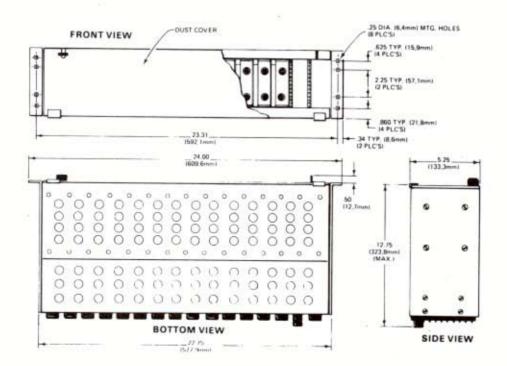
Surface Mounted Card Racks (SMR), Outline and Dimensions
